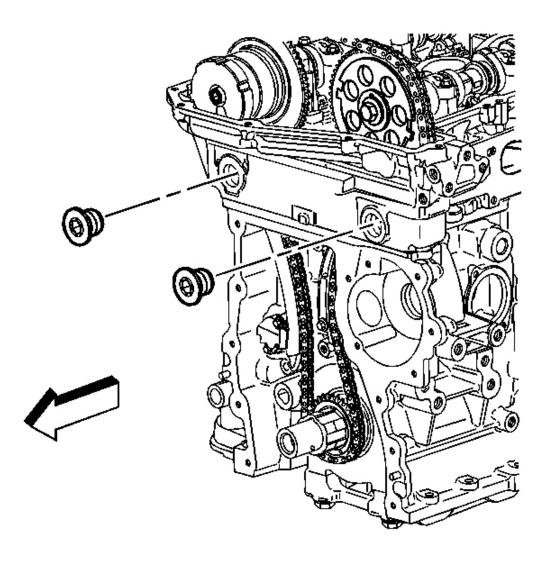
View Of Cylinder Head Access Hole Plugs Courtesy of GENERAL MOTORS CORP.
